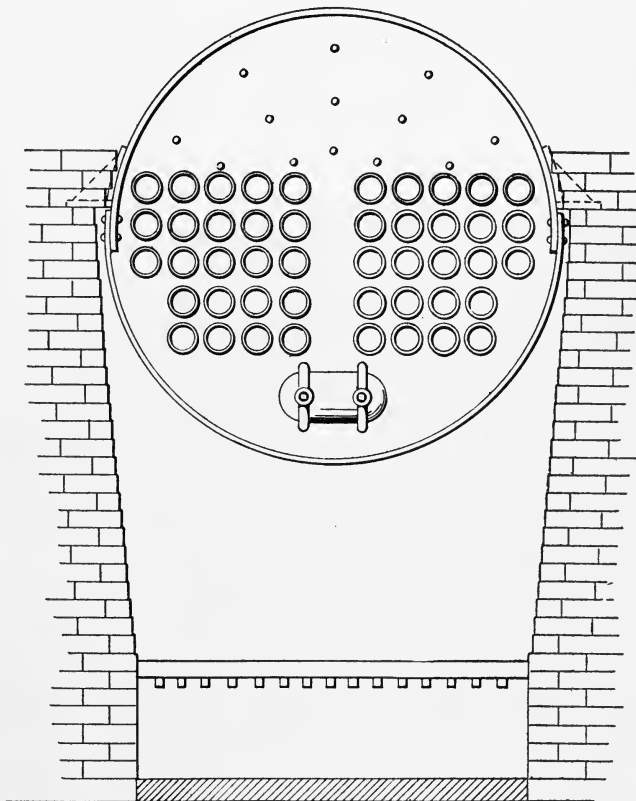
Seams of single-sheet boiler inaccessible and exposed to furnace heat.
